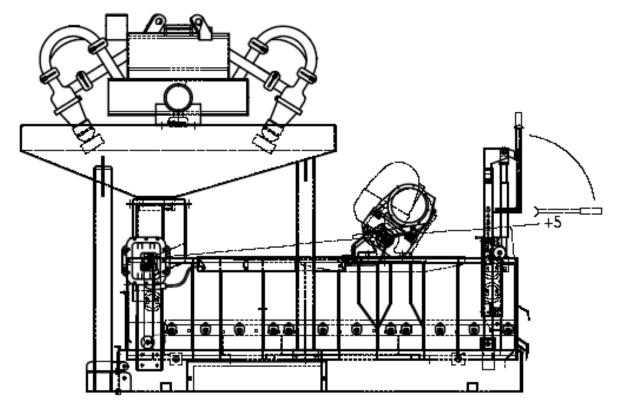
FLC-313M Fluid Cleaner With Box Feeder and 12-Way Desilter
